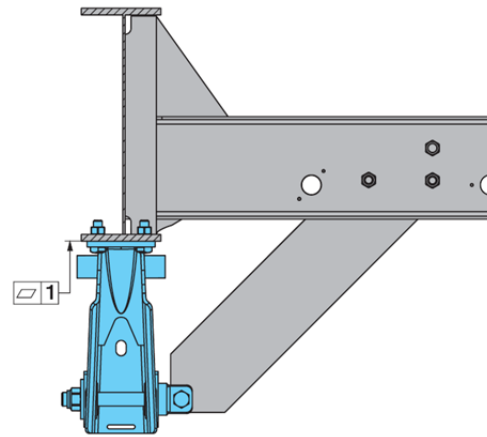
Struts in bolted steel air suspension hanger brackets. (Front view).
